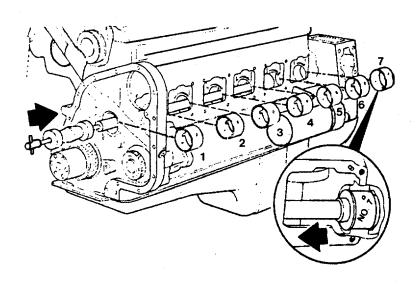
Camshaft Bushing/Bearing Removal Sequence.
